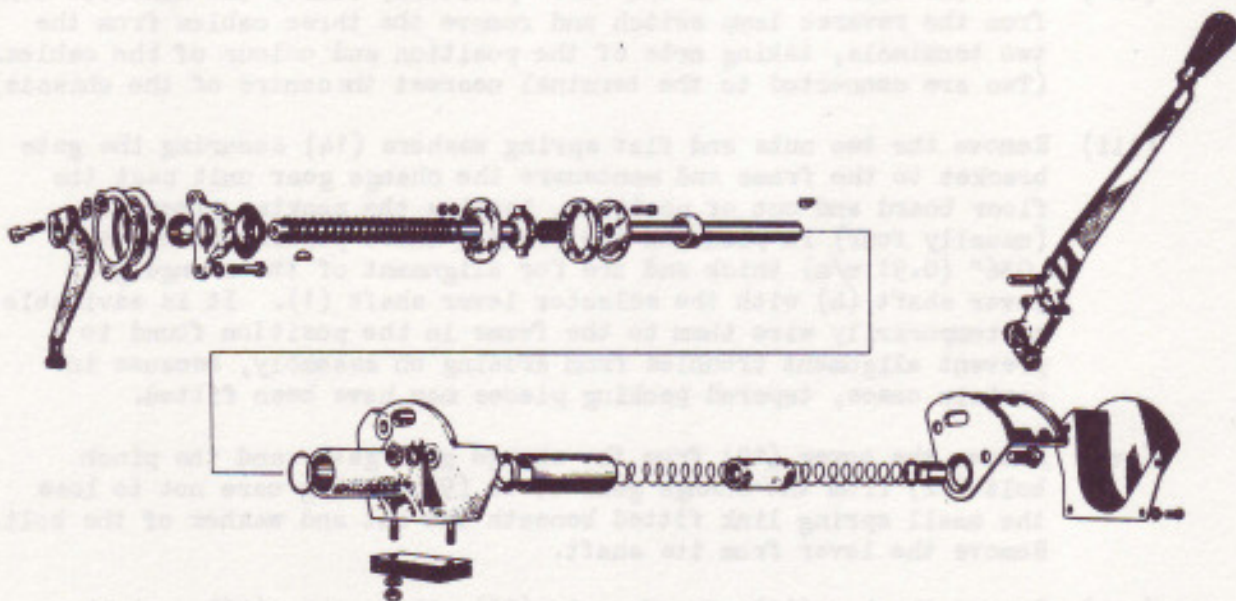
A. EXPLODED VIEW - SIDE CHANGE GEAR MECHANISM.
